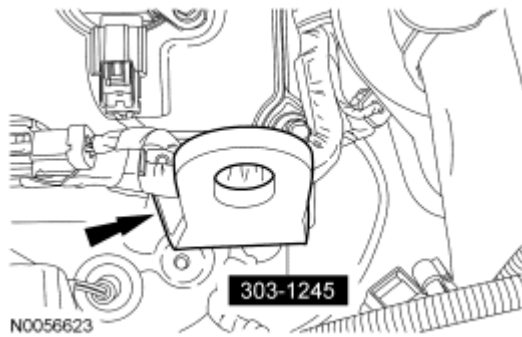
Special Tool (303-1245) On LH Cylinder Head
